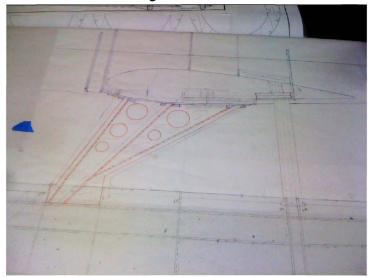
shows Robert's drawing of float mounting arrangements in wing and center float and the internal crutch for the pylon
